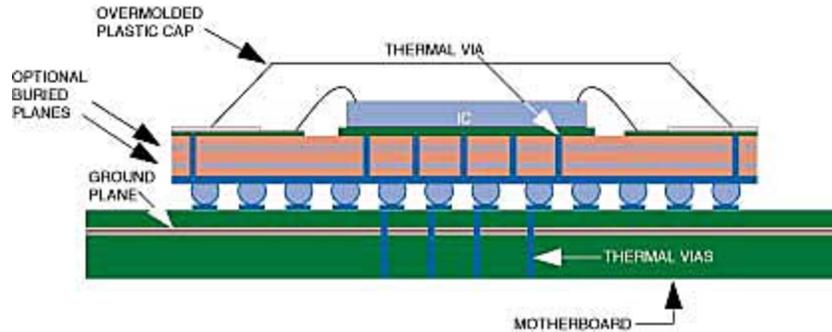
Diagram of a PBGA package, soldered to a PCB
